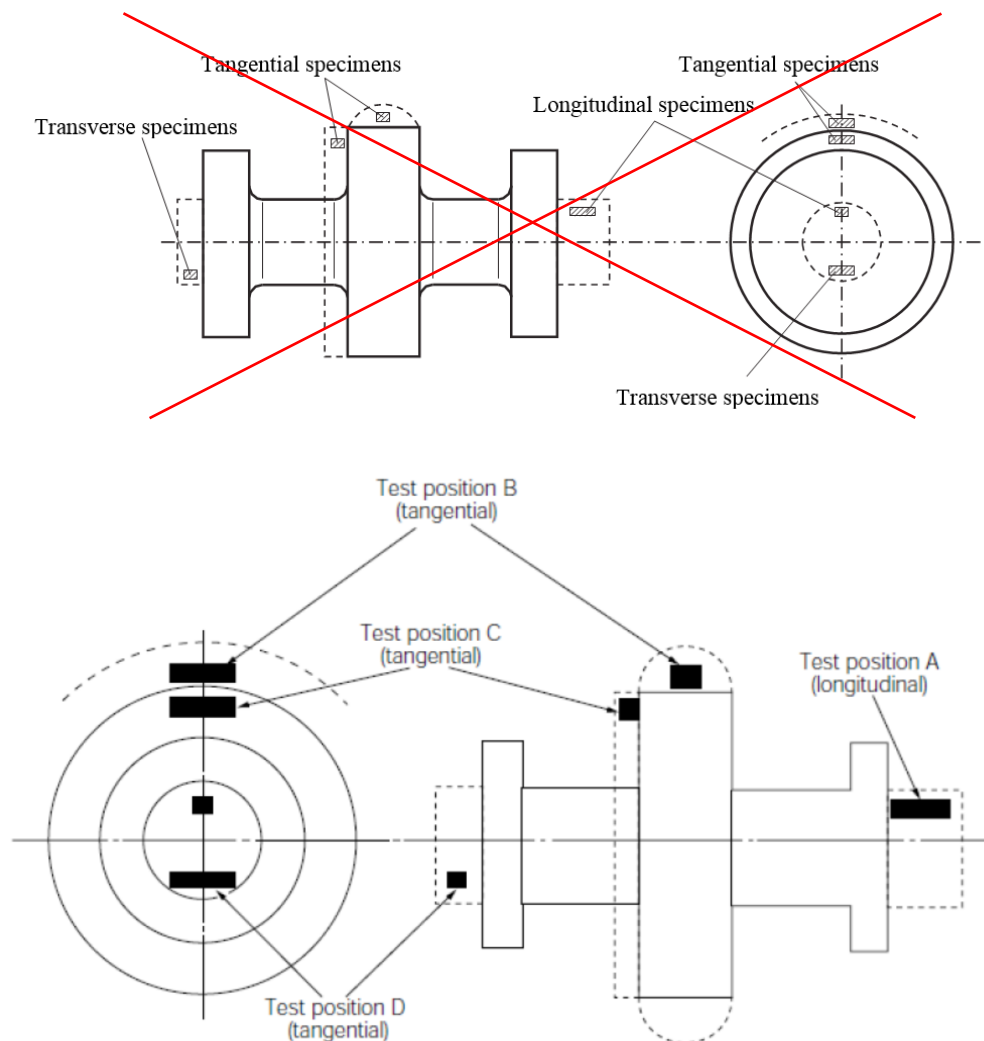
Location of specimens in flanged shafts with thrust flange
